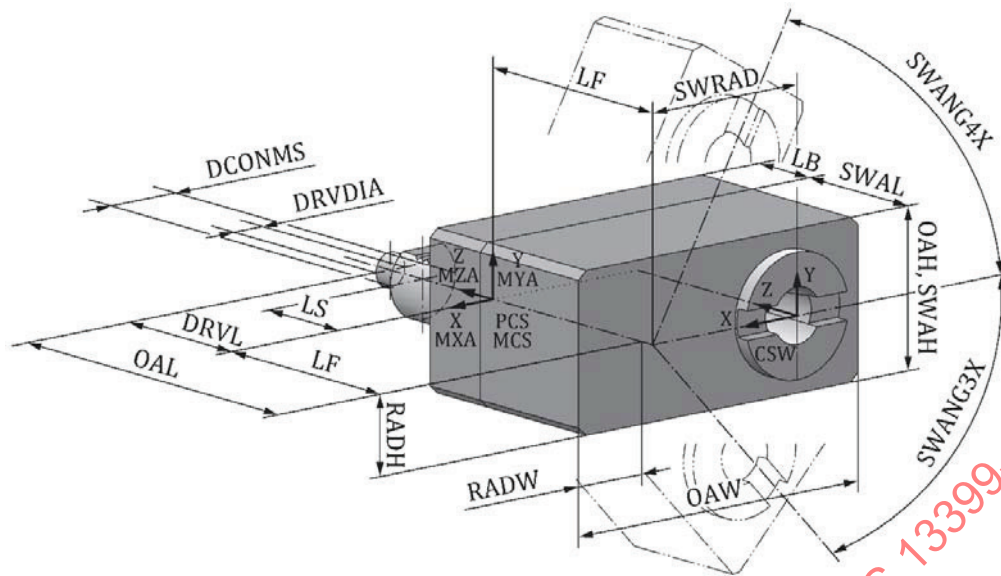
Assembled driven tool unit with rotatable design about the z-axis
